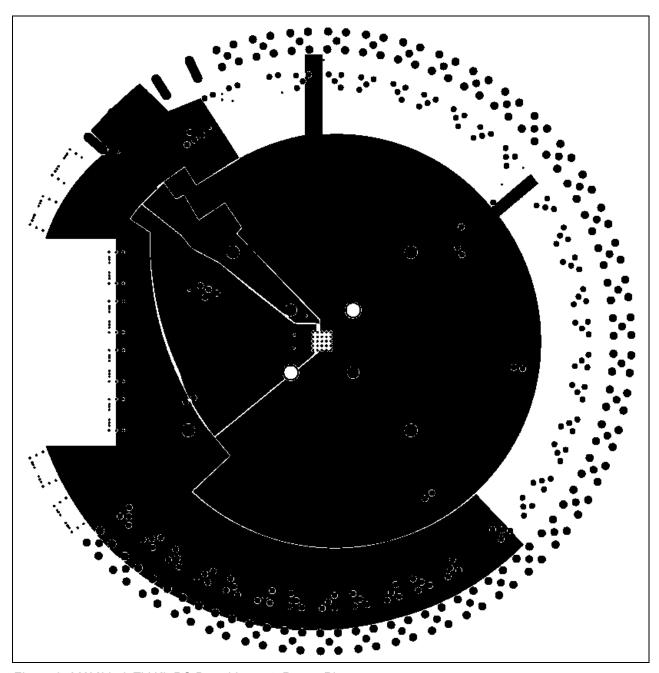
MAX3952 EV Kit PC Board Layout-Power Plane
